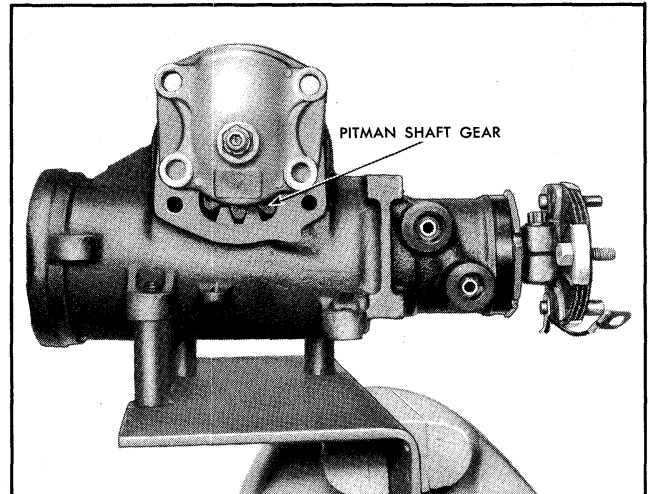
A-8 Position of Pitman Shaft Gear for Removal
